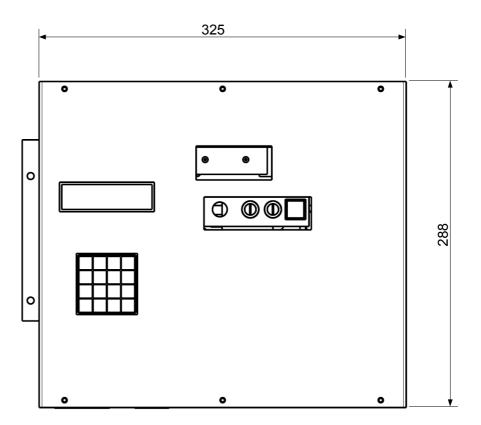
Dimensions of the Controller SP92Y2 (in mm)
